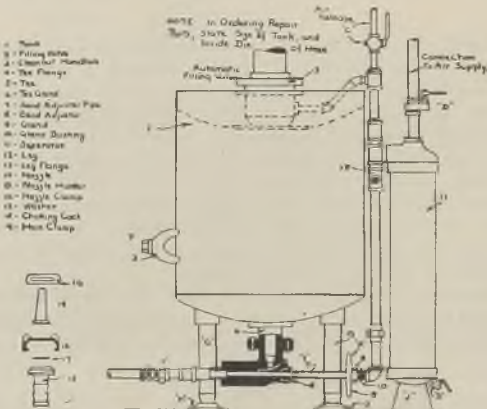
DETAILS OF A SAND BLAST MACHINE.
